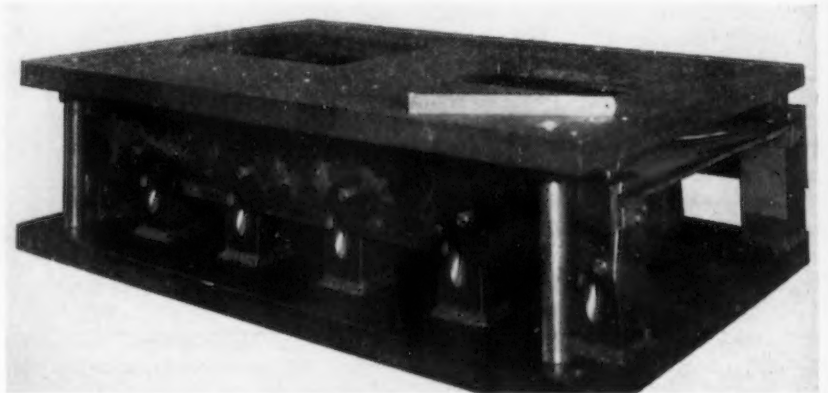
Welded steel die shoe measuring 33½x52½ in., used at a large tractor plant in punching 12¾x1-in. holes in ½-in. stock. The base is made of 2-in. boiler plate.
